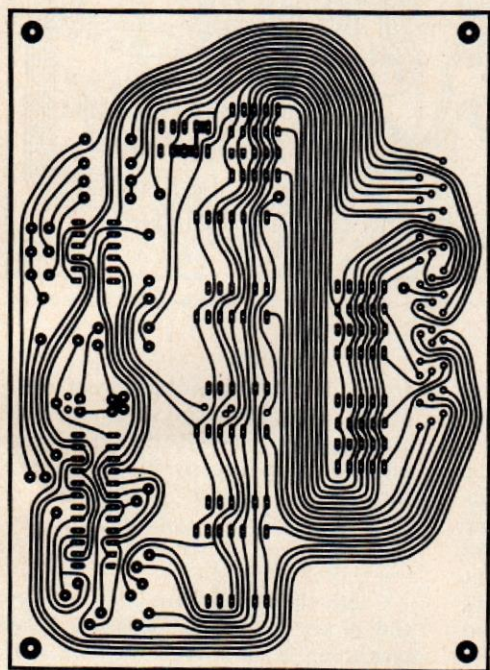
FOIL PATTERN of single-sided display board. Actual board measures 4 × 5½ inches.
